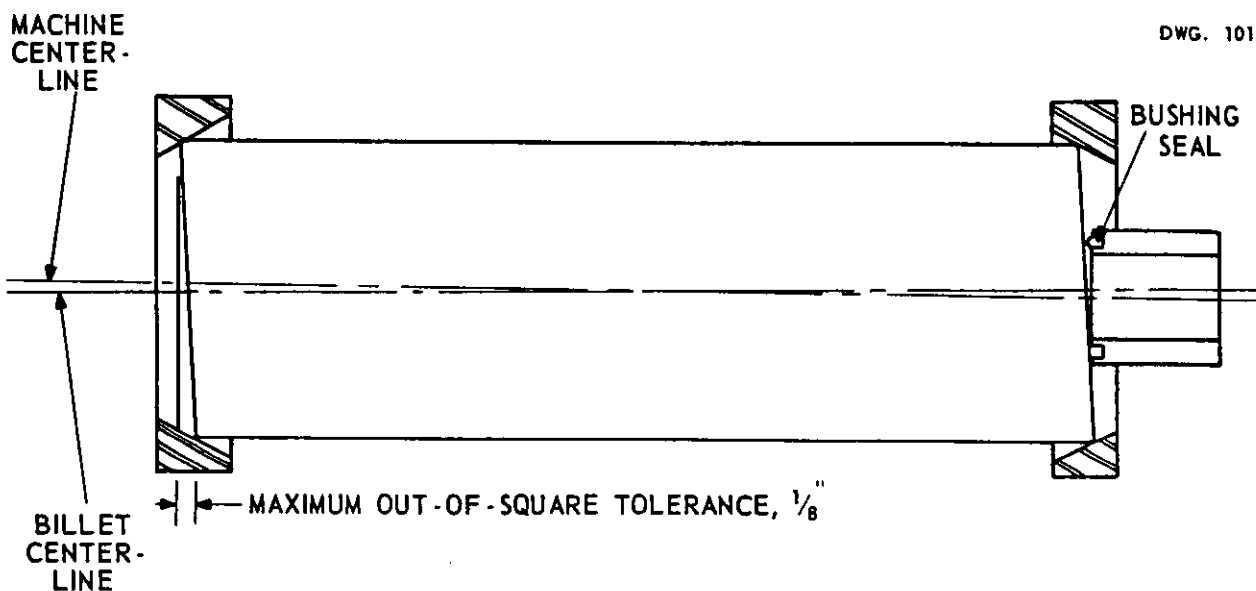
Schematic Diagram of Billet with End Faces Out of Square Chucked in Rapid Borer
